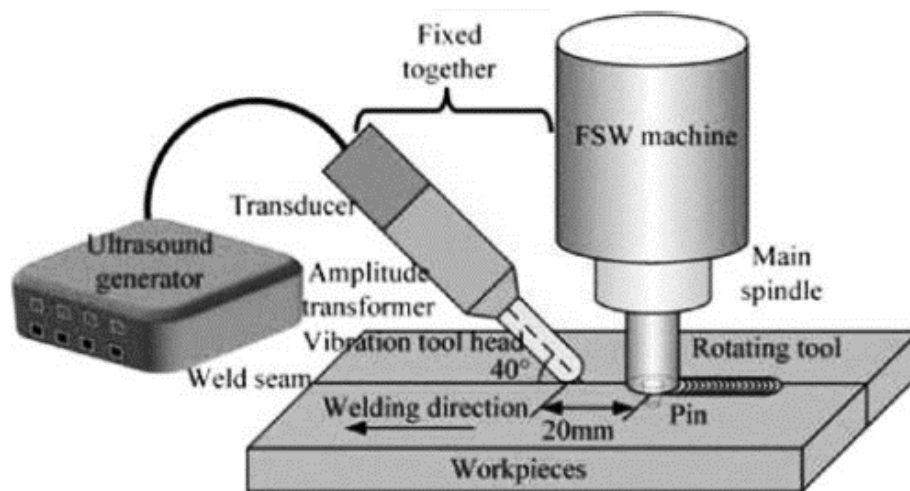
e : Schematic of ultrasonic vibration assisted friction stir welding (Liu, Wu and Padhy 2015)
